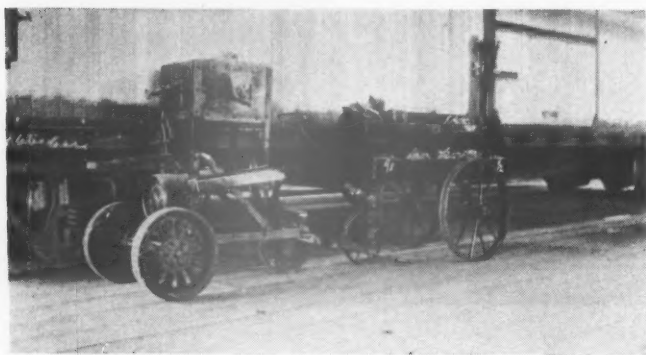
Portable rivet heating forge and rack used in refrigerator car work
